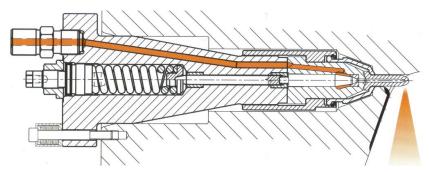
The position of the injector at the edge of the combustion chamber in a two-stroke crosshead diesel engine
